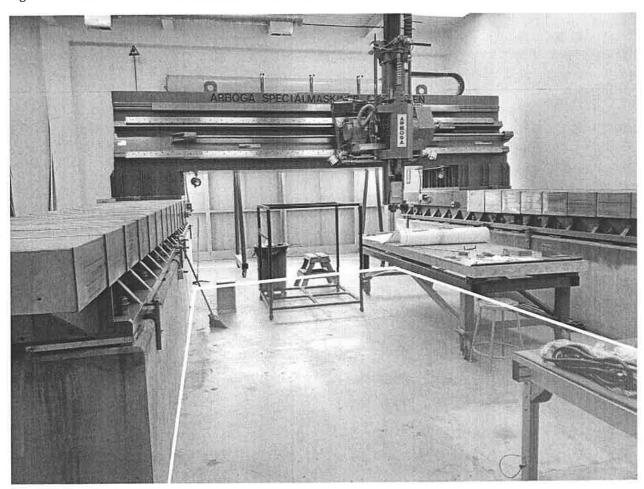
Alternate view of location of 5 axis CNC machine (Old machine removal in process)
